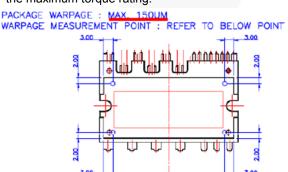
Measurement Points of Package Surface Flatness (Blue circles)
